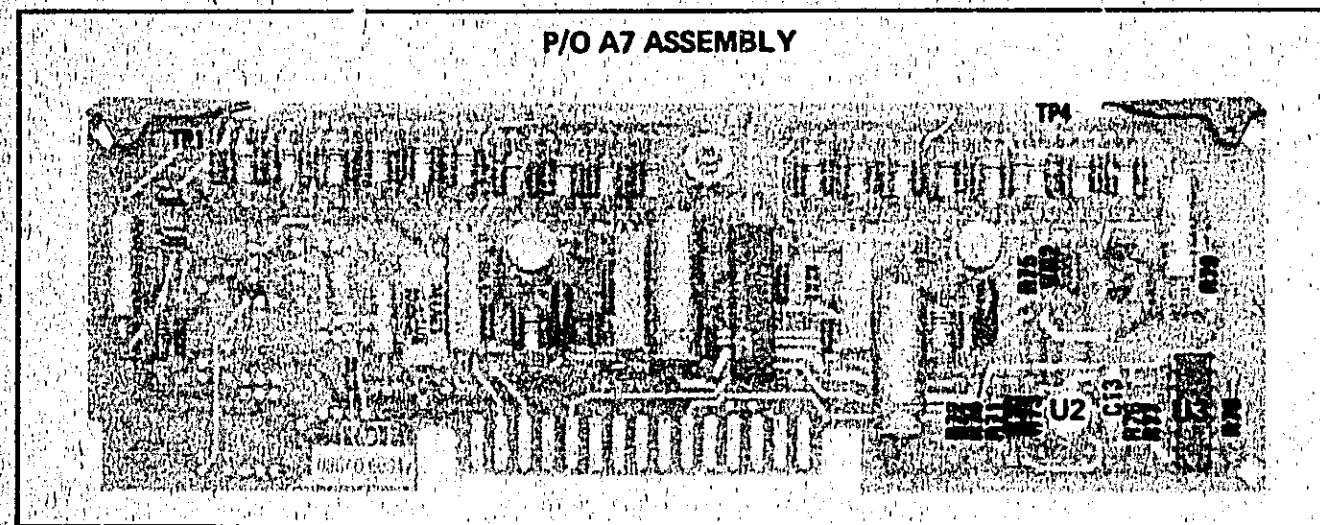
P/O A7 FM Shaping Assembly Component Locations
